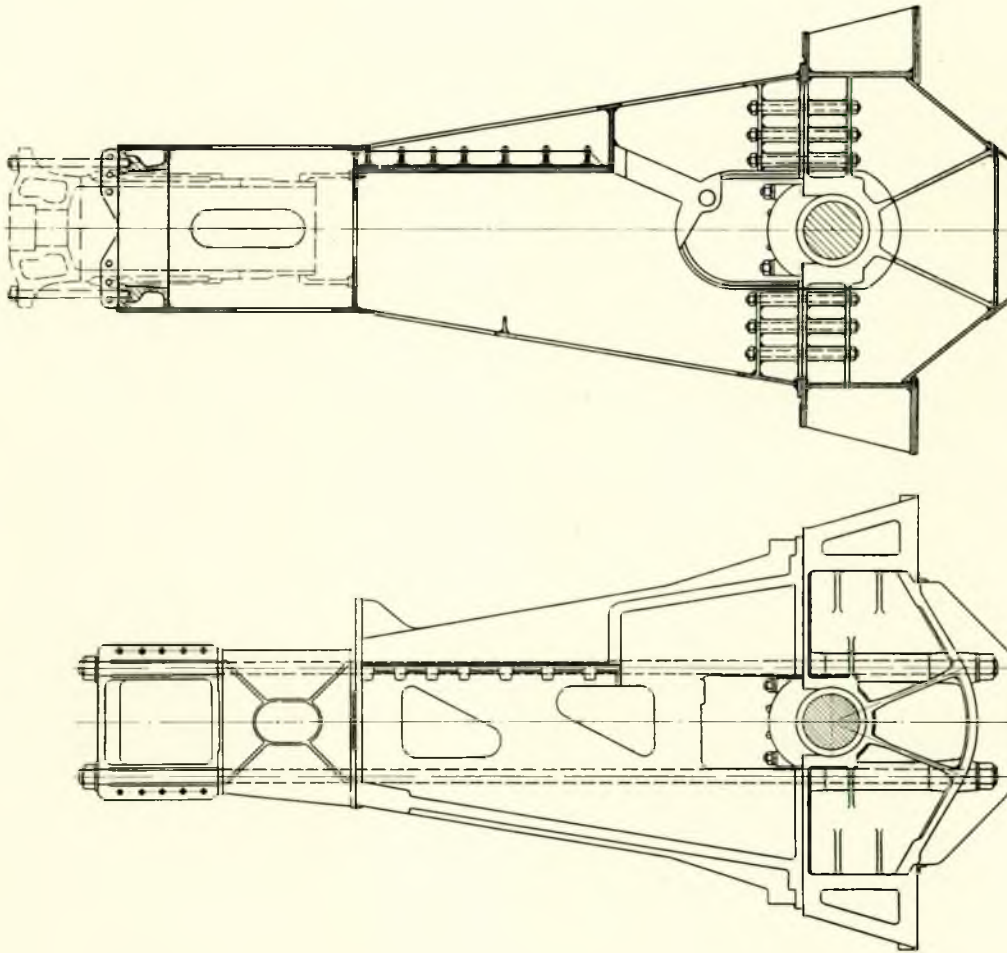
The cast entablature (left) and the all-welded arrangement (right)
